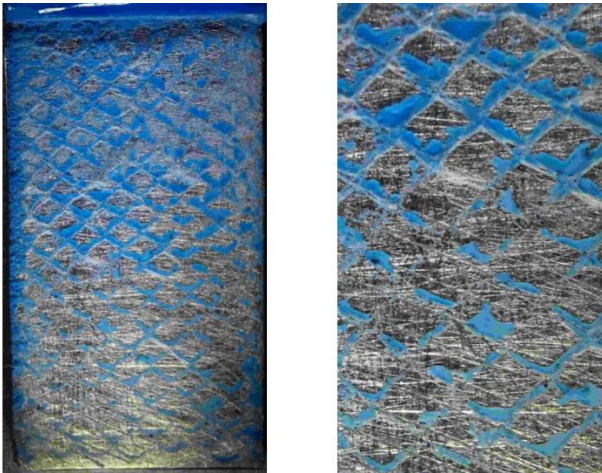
SLJ-Sample1-fracture surface which is captured by an optical microscope
